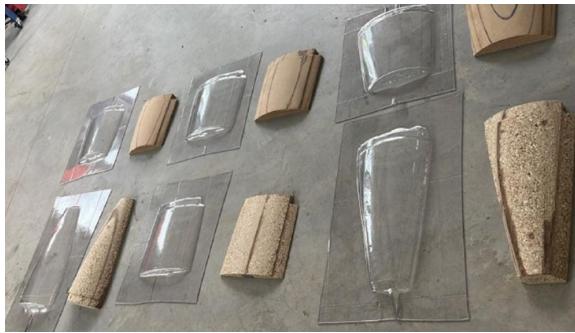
Positive moulds and vacuum formed PET-G parts . Each hull section was formed by a different mould.
